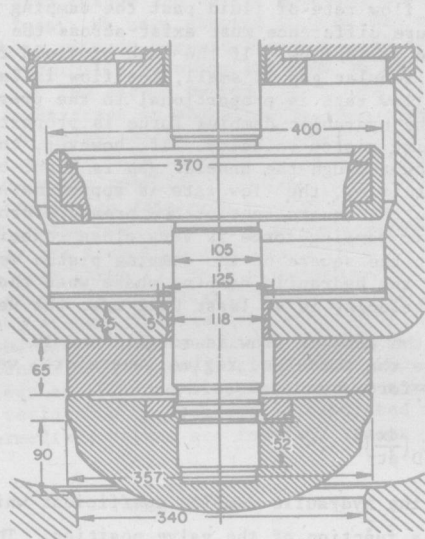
Valve head, damping-piston, and damping chamber (from Ref. 1). Dimensions are given in millimeters.
